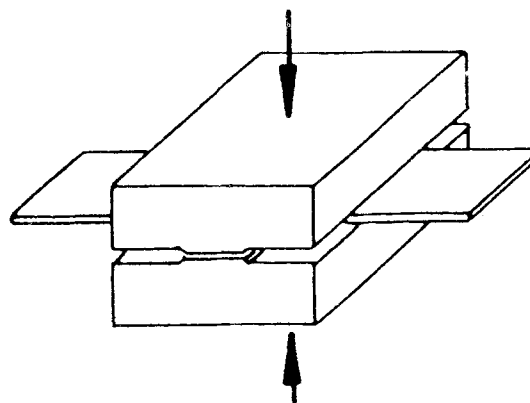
Method of inducing transverse compression damage with a plane-strain compression jig.
